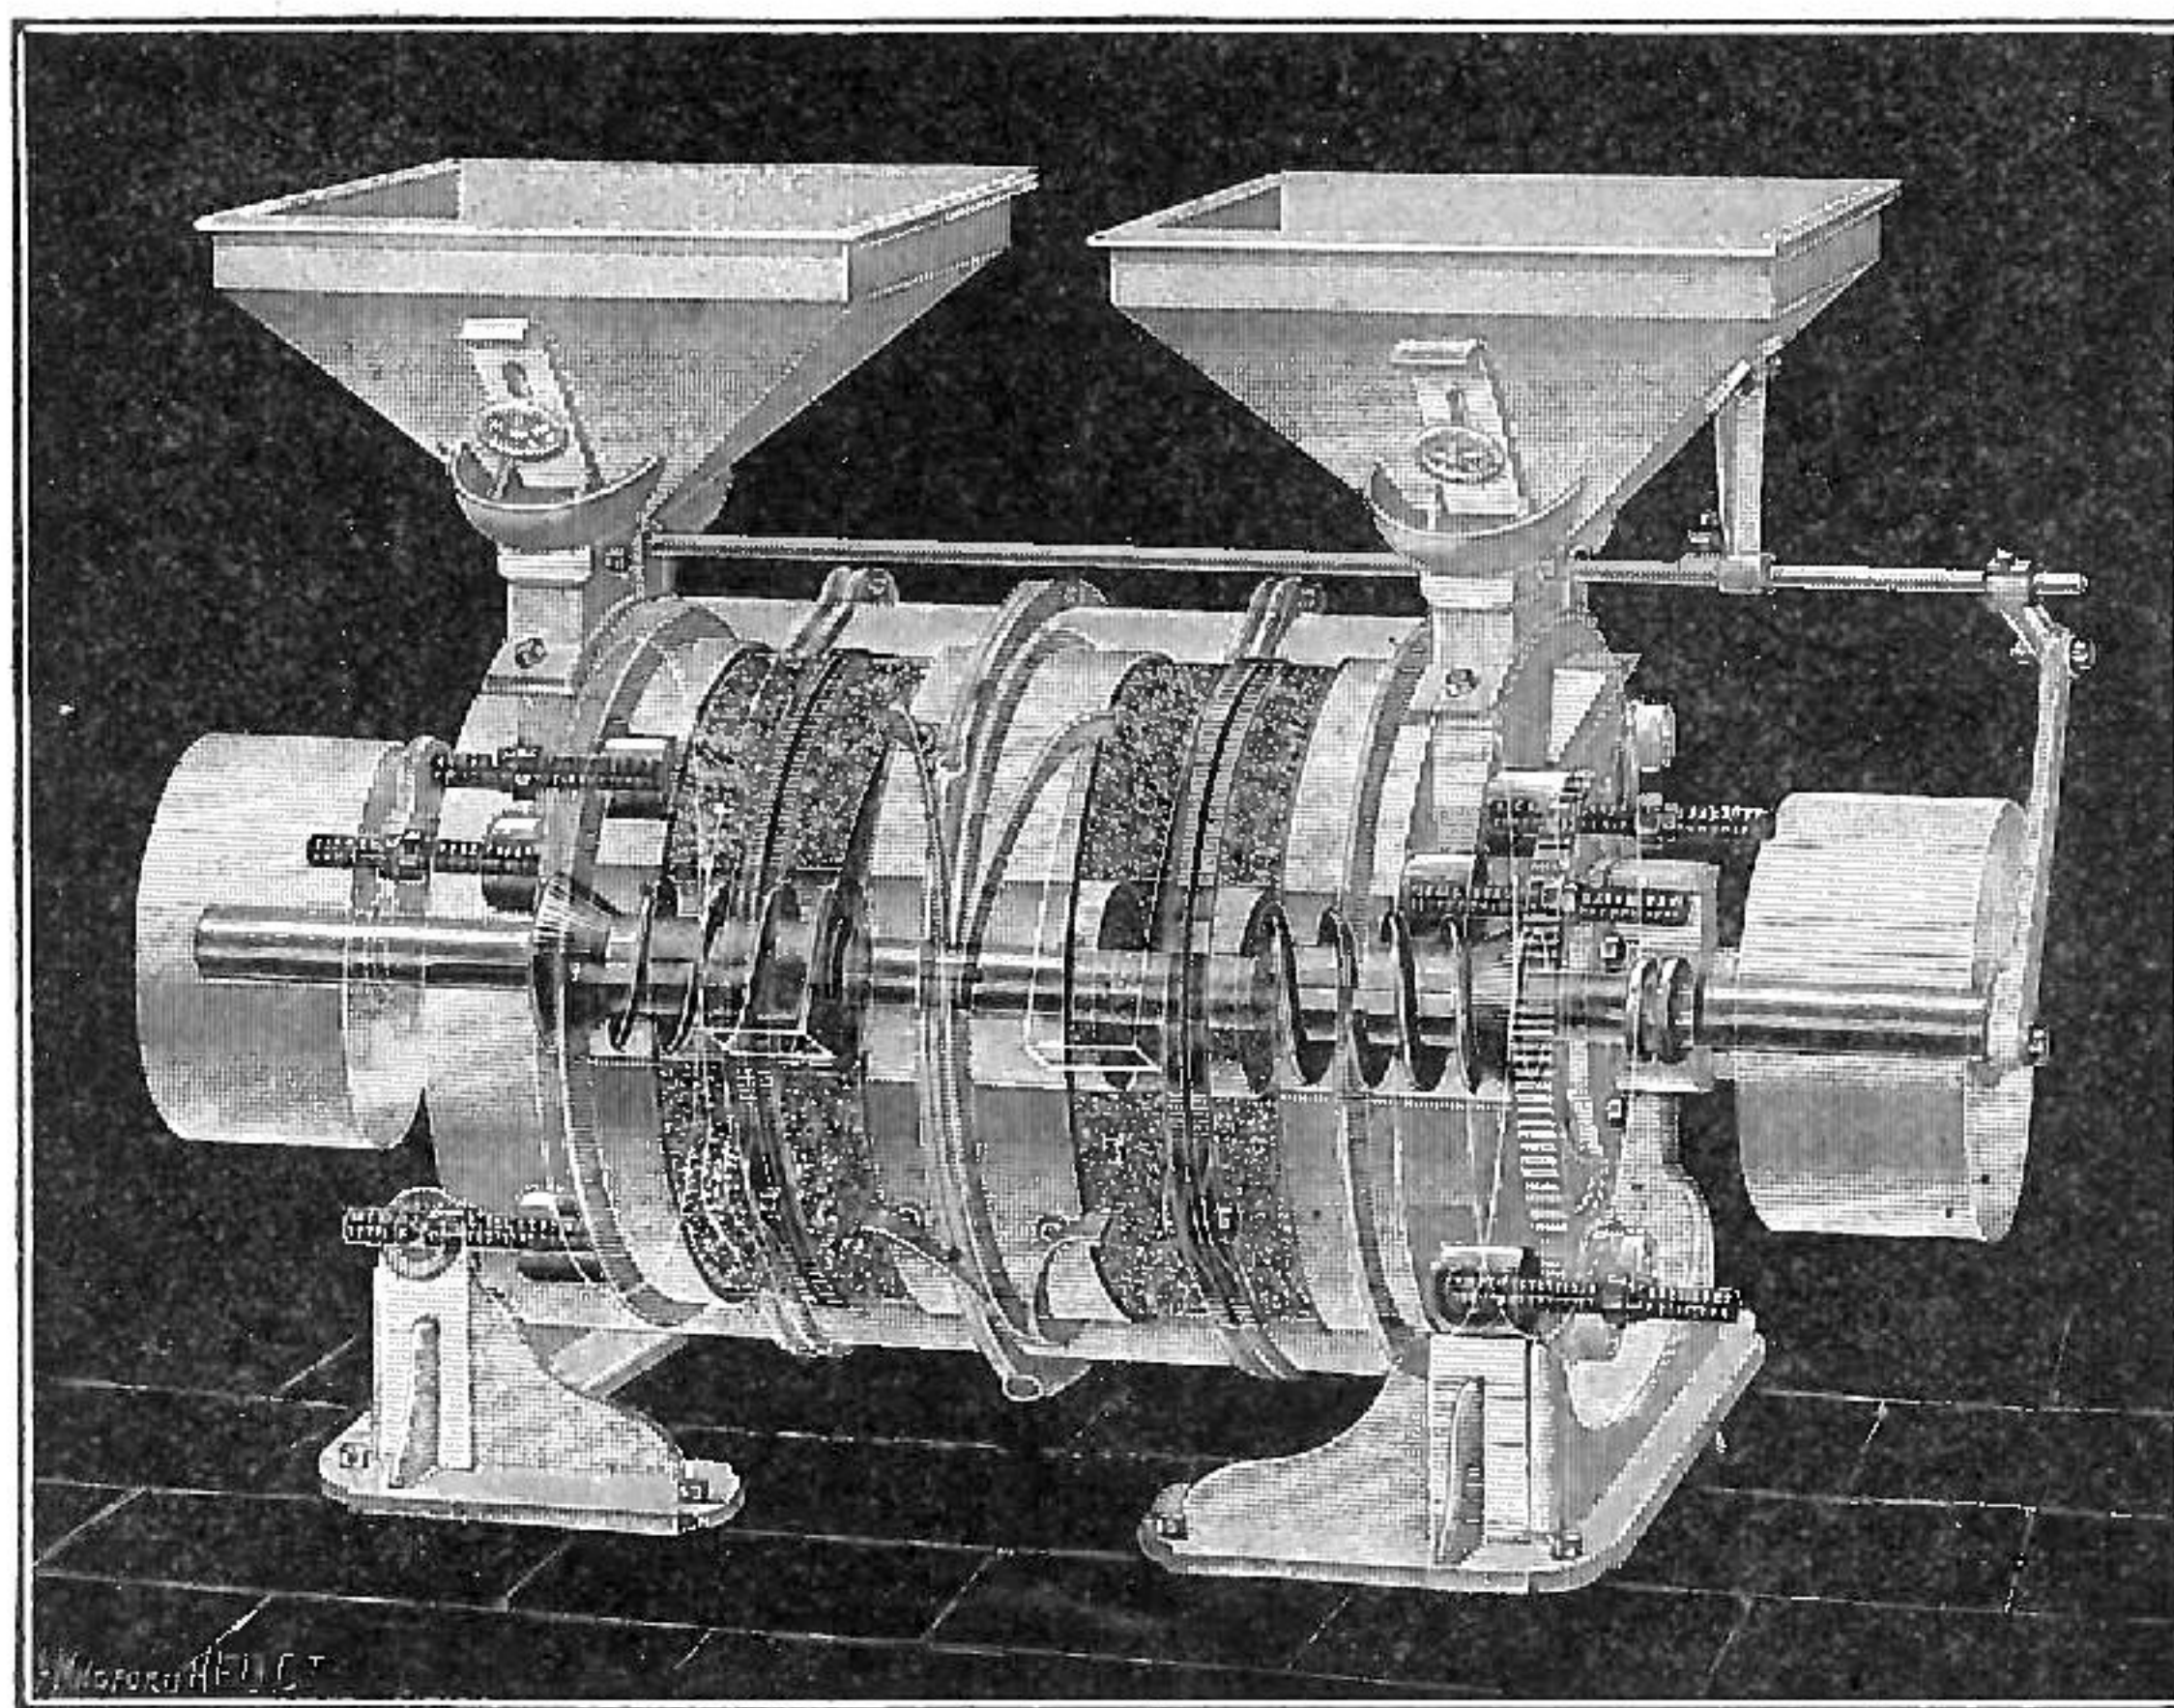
INTERNAL VIEW OF THE DOUBLE MILL.
